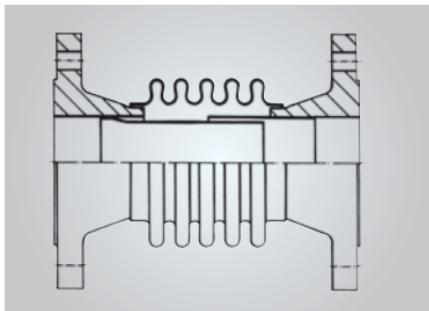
Axial expansion joint with welding neck flanges
